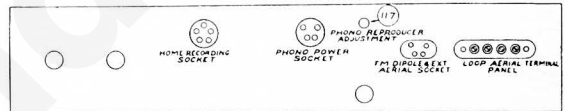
REAR VIEW OF CHASSIS SHOWING SOCKET LOCATION AND PHONO COMPENSATOR
